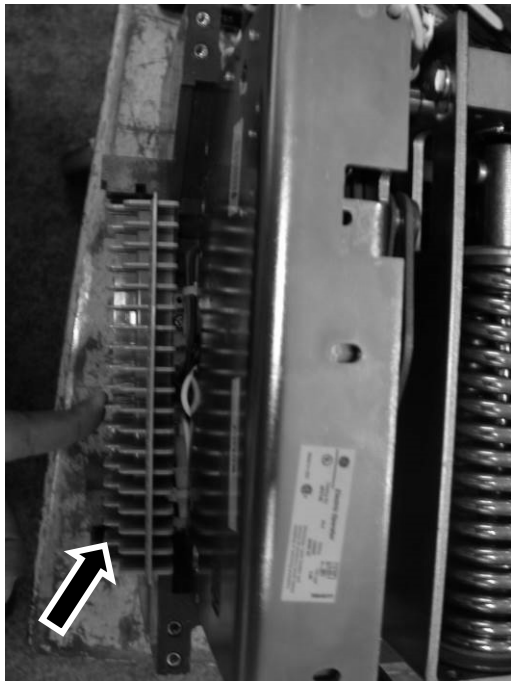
Secondary Connections Piece to be Removed Before Electric Operator
